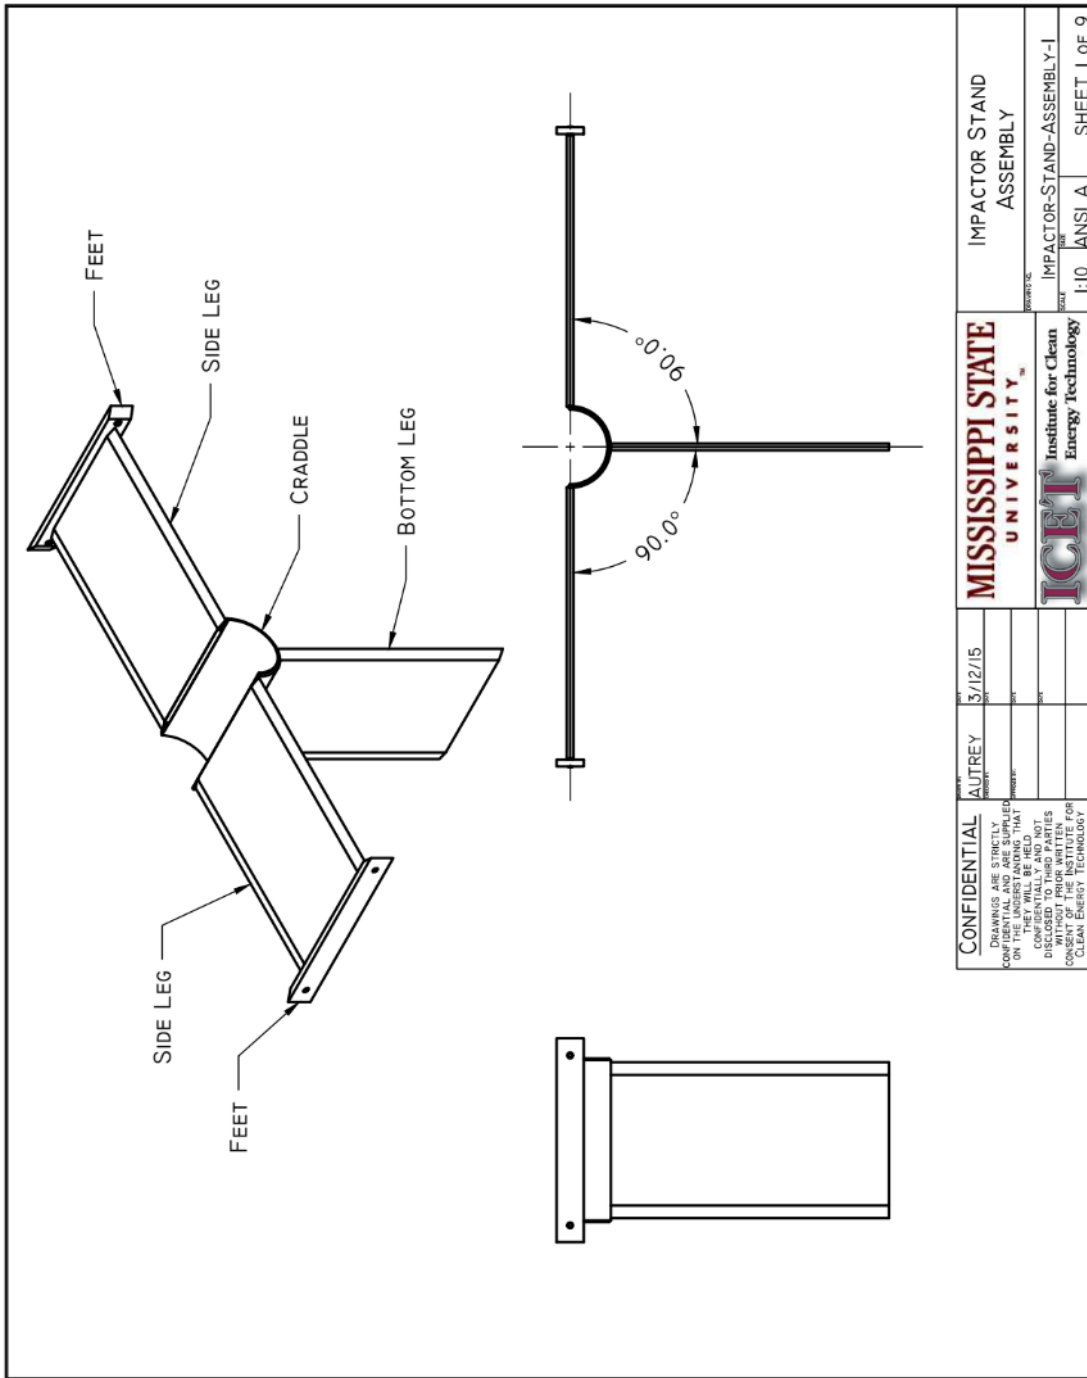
CAD drawing of the Pilat impactor stand assembly.
